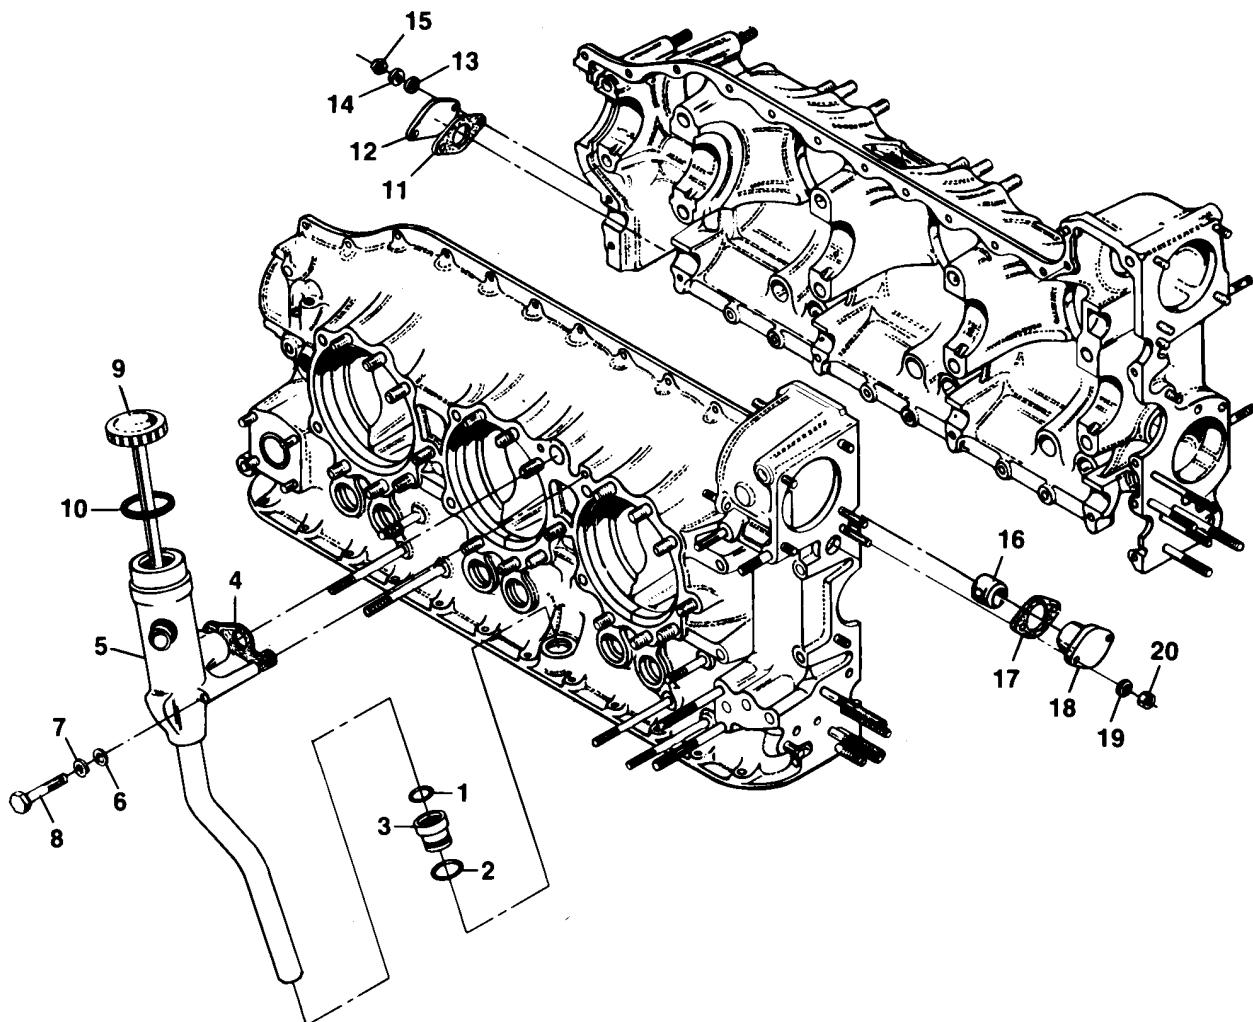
B. CRANKCASE ATTACHING PARTS IO-550-G,N,P,R
